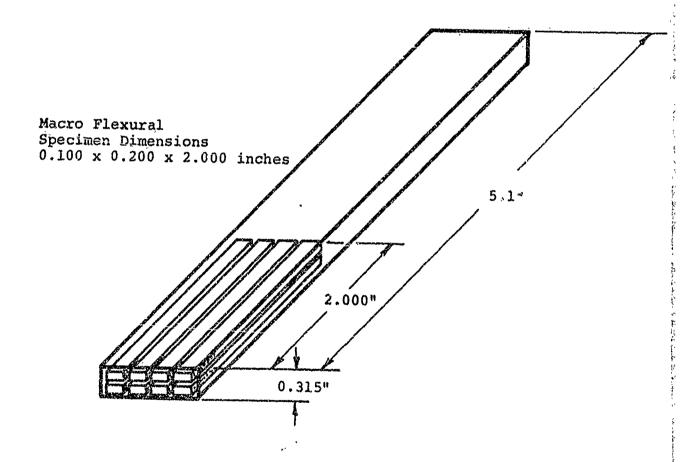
Cutting Plan - Specimen Blanks 3A09-120 and 3A09-144
